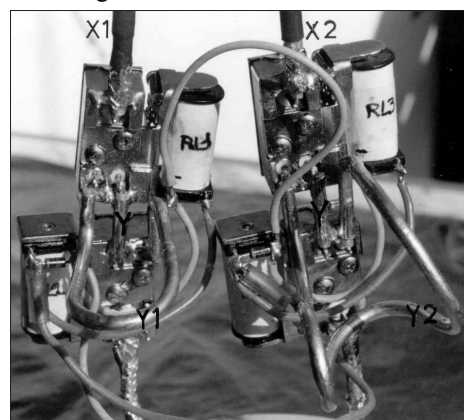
Close view of the soldering technique between coax cable UT141 and the relay ports.
